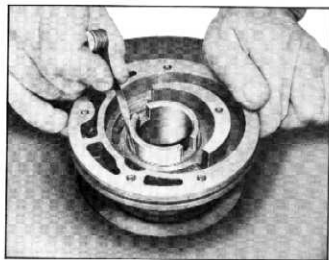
Clearance Pump Body Bushing to Converter Pump Hub
